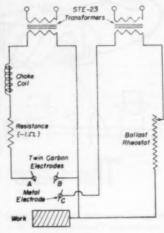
Welding Power Circuit for Multiple-Arc Welding
